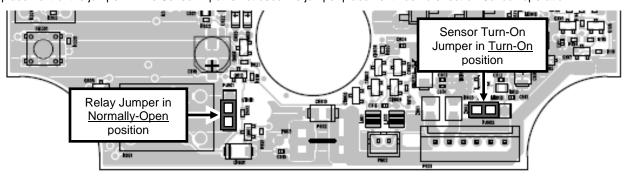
Sensor Turn-On Jumper Shown in Turn-On Position
